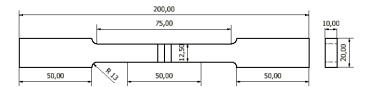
Tensile Test Dimensions Tensile Test ASTM E8
